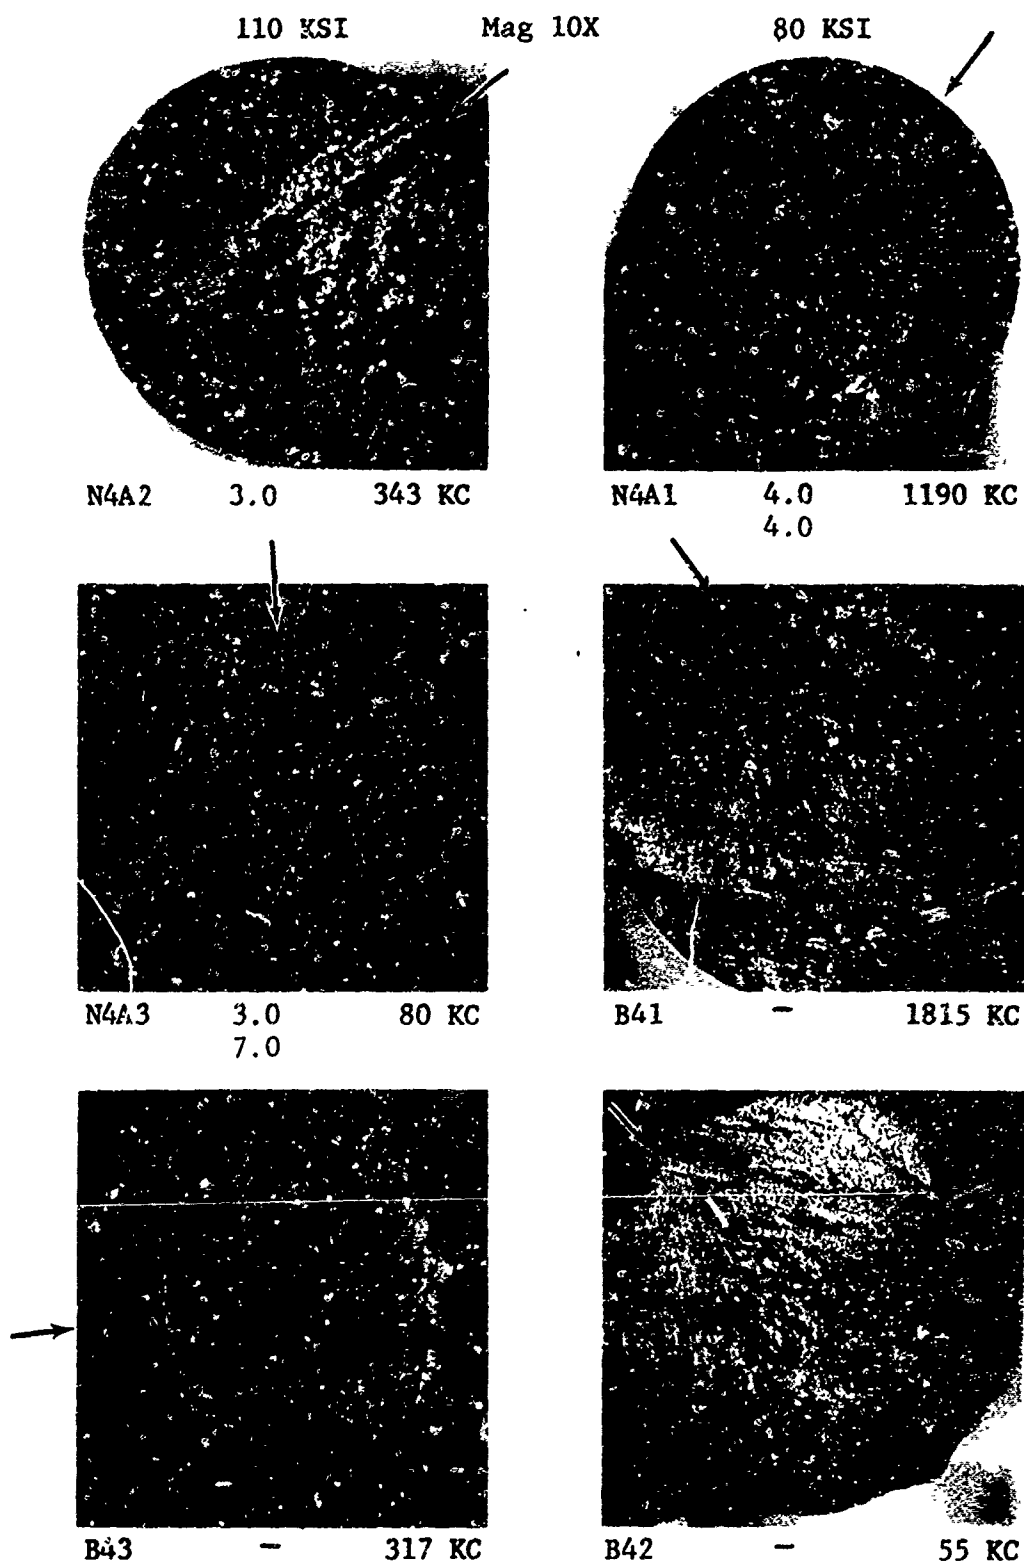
Fracture Surfaces of Failed Fatigue Specimens Series N4-
